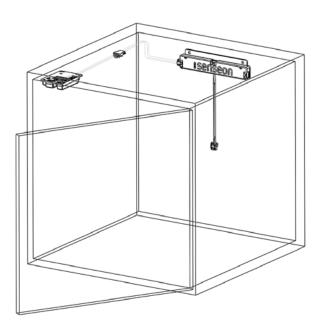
One lock cable routing from a hub to a flat mounted stand alone lock
